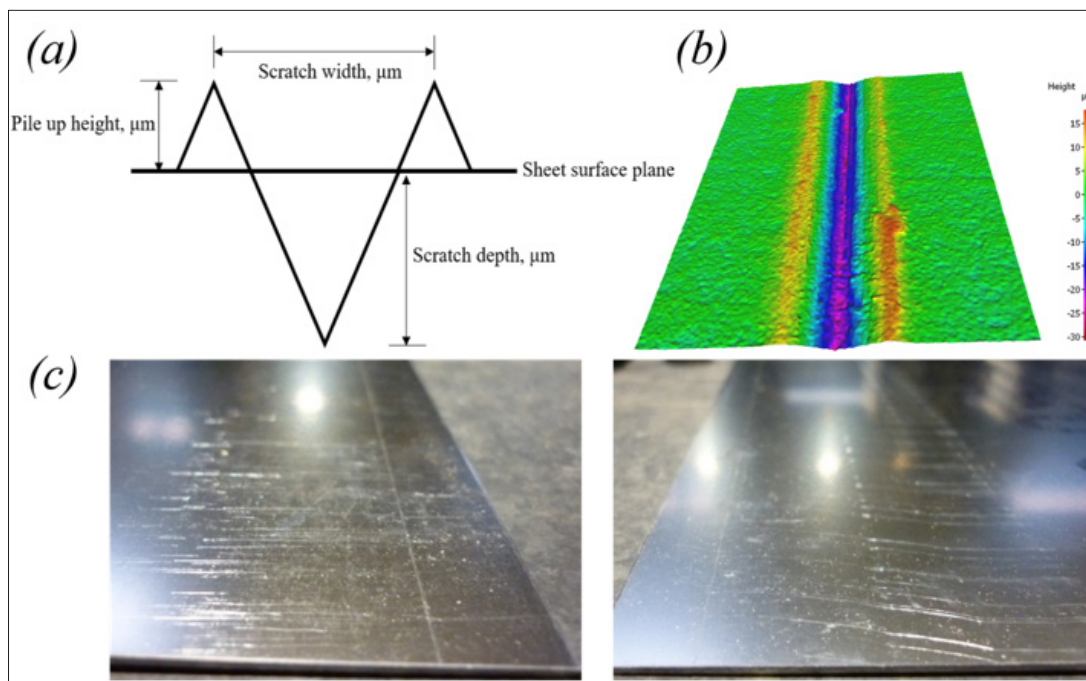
Ti-3Al-2.5V sheet metal surface condition
